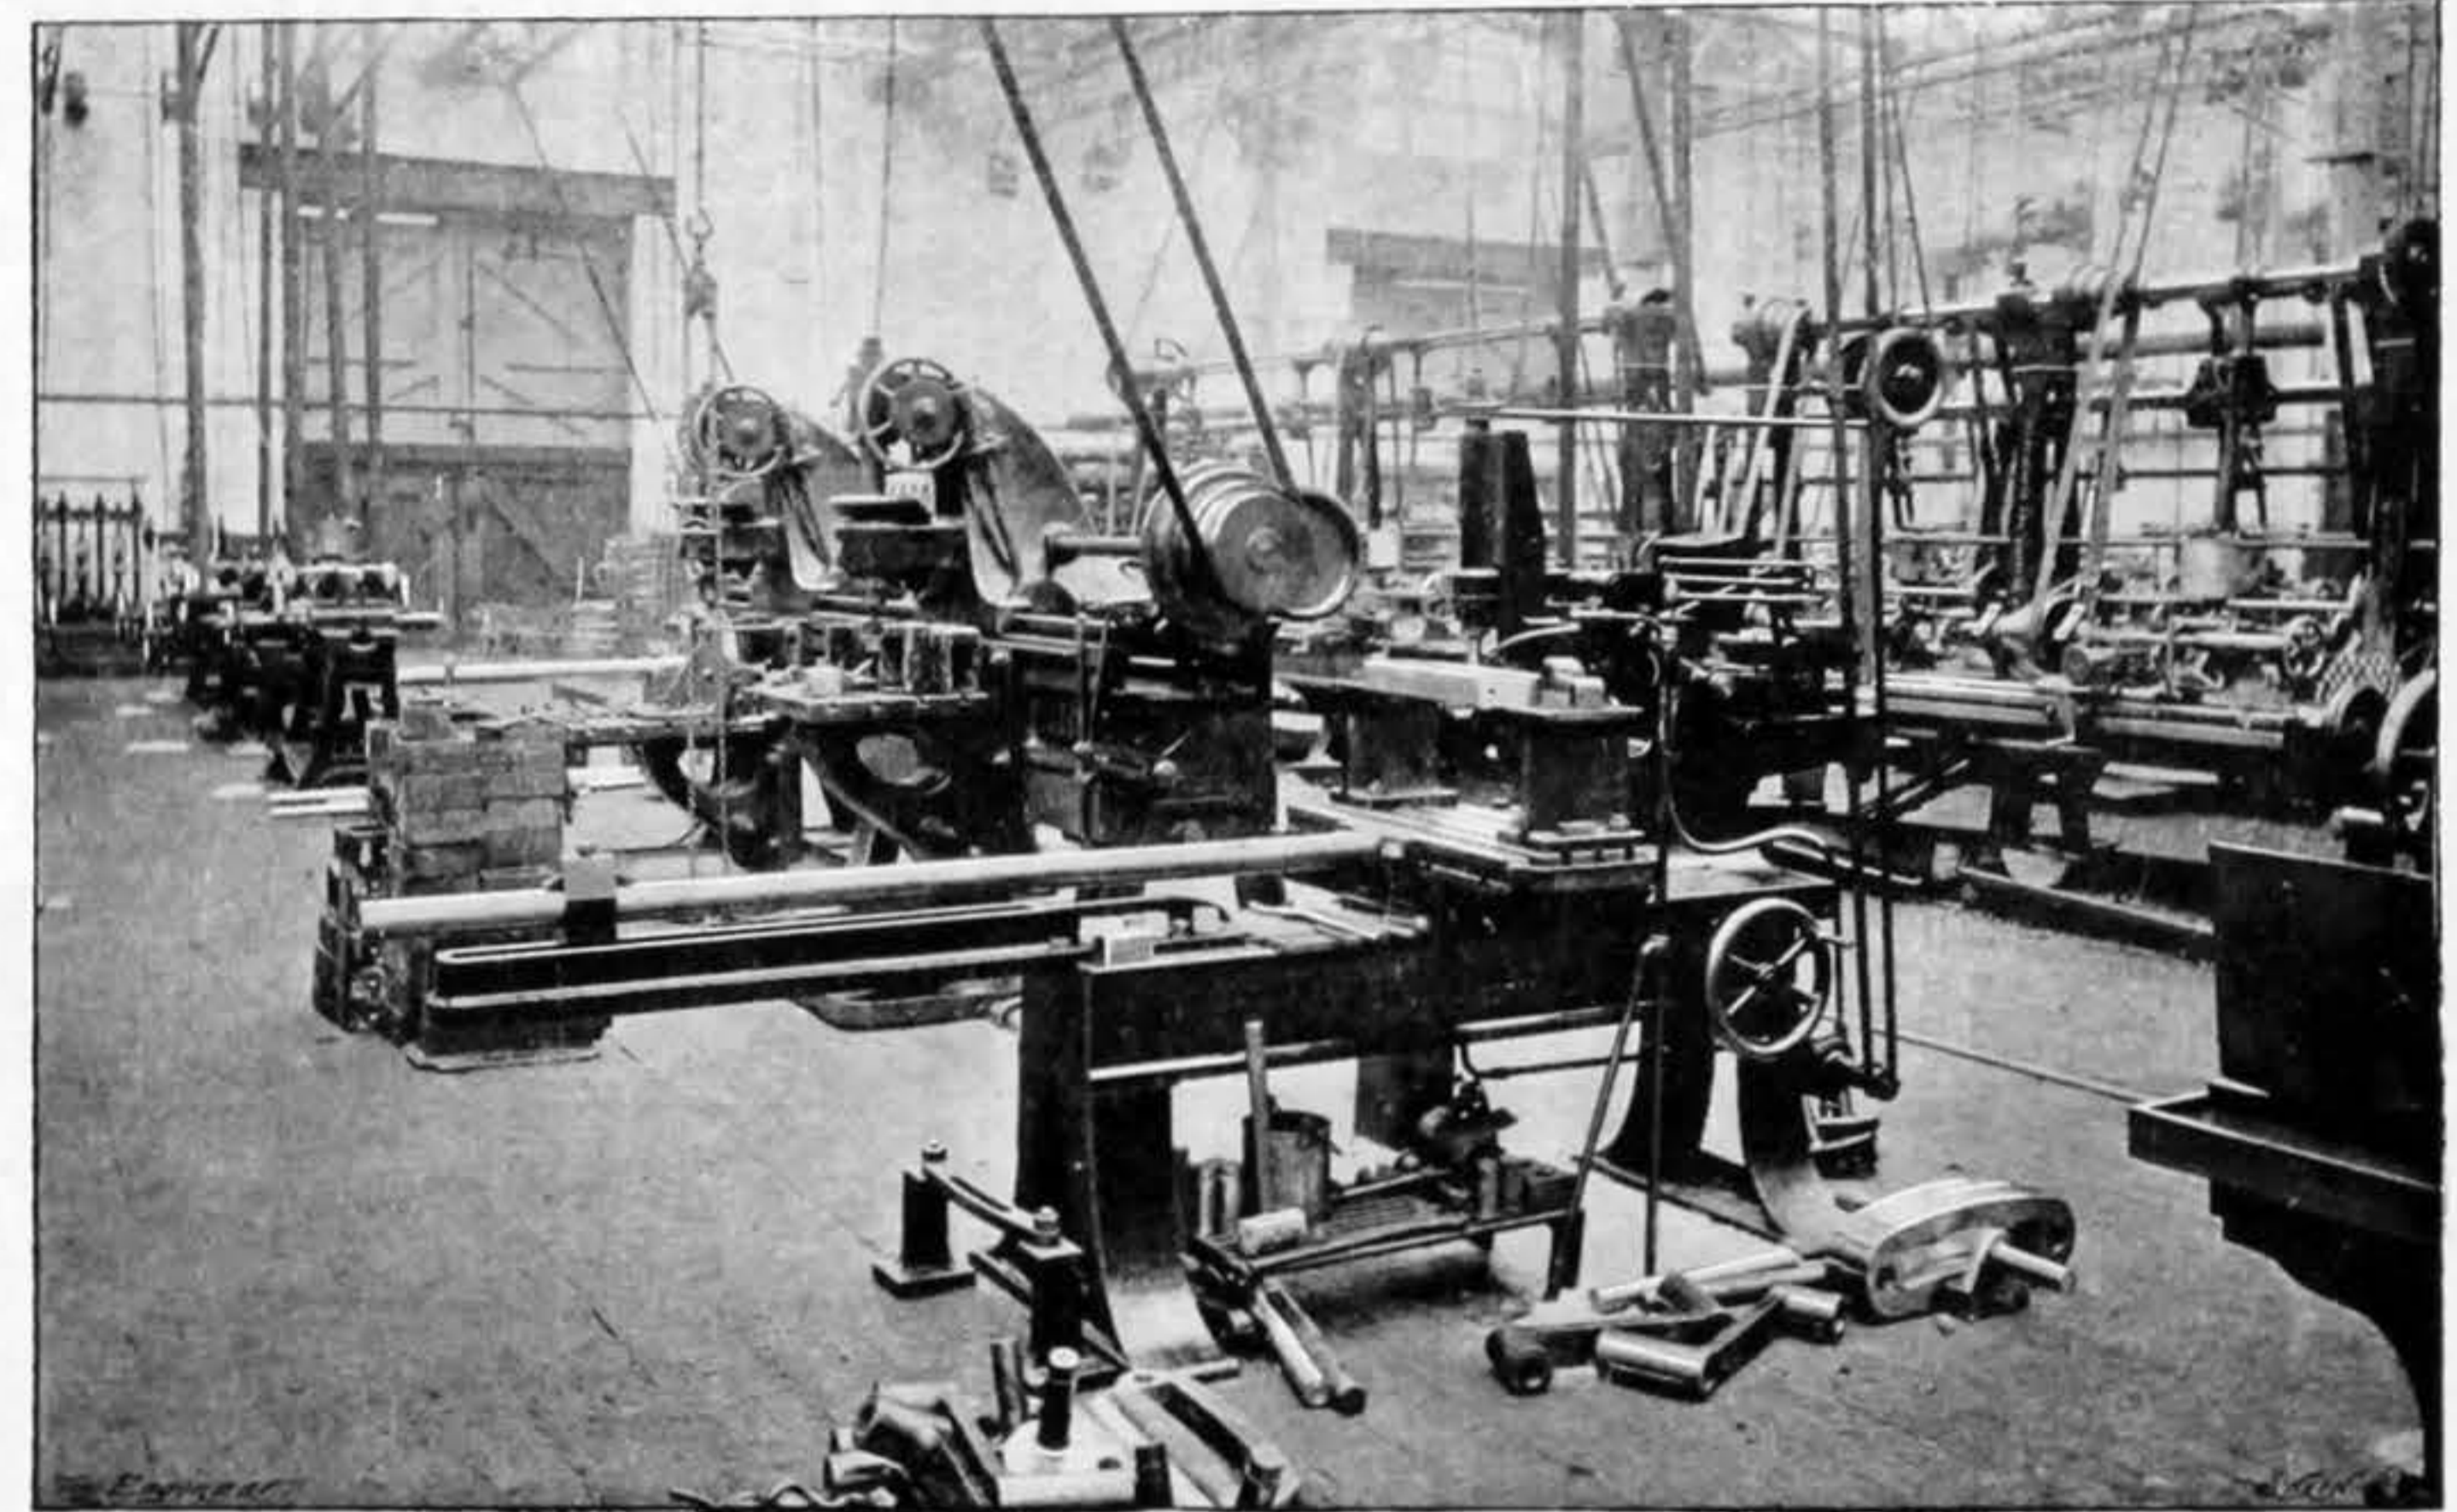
EMERY MACHINES FOR FINISHING SLOTTED LINKS
